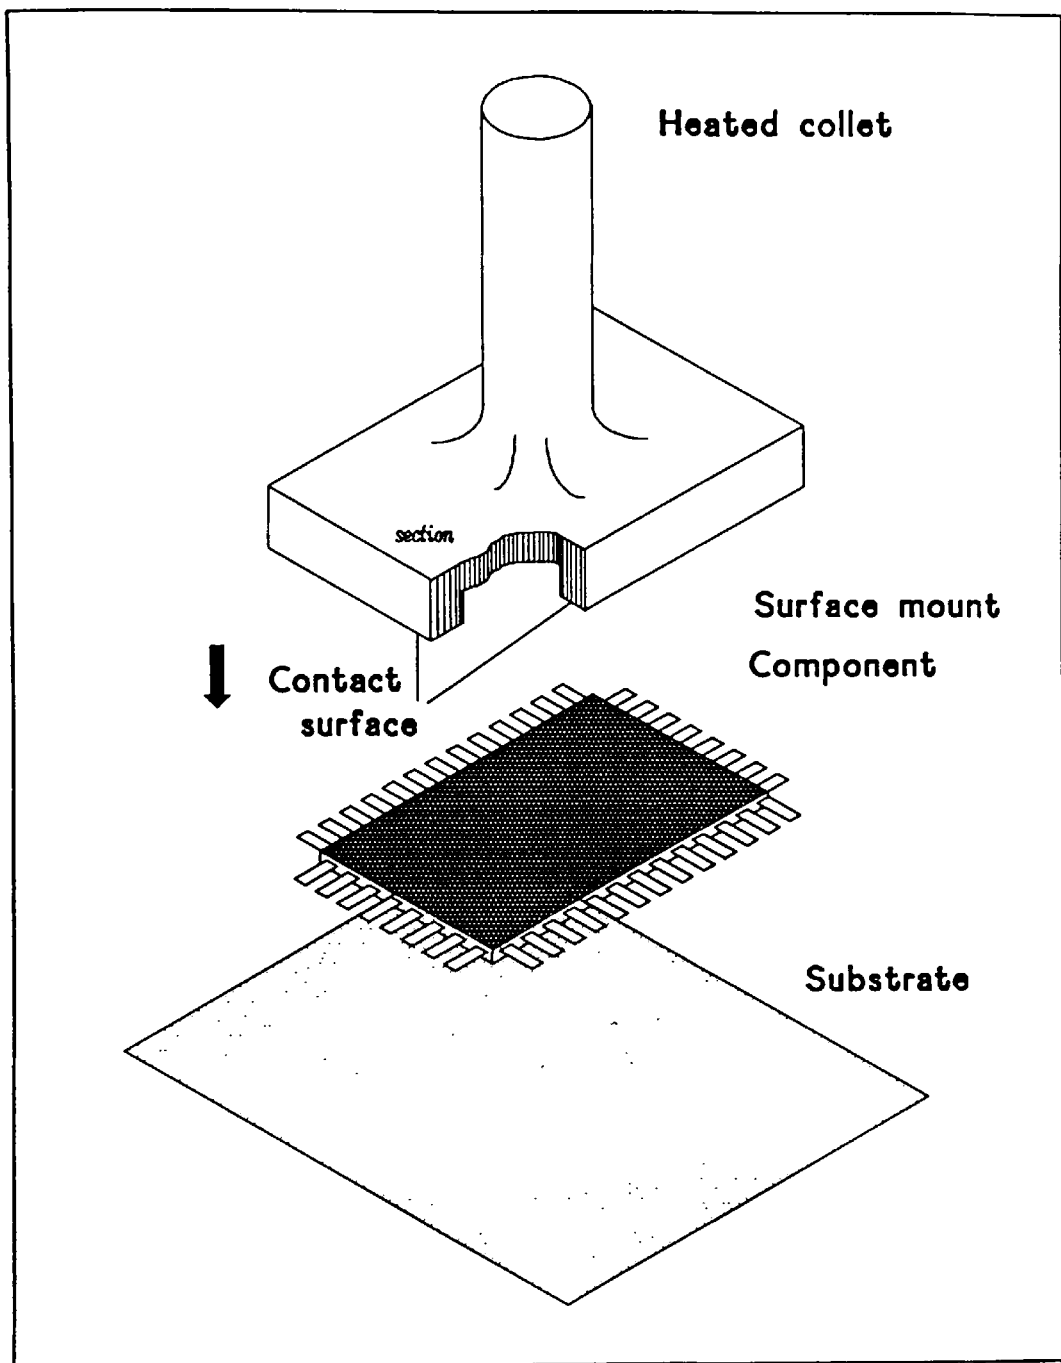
Heated collet used to solder high pin count integrated circuit
